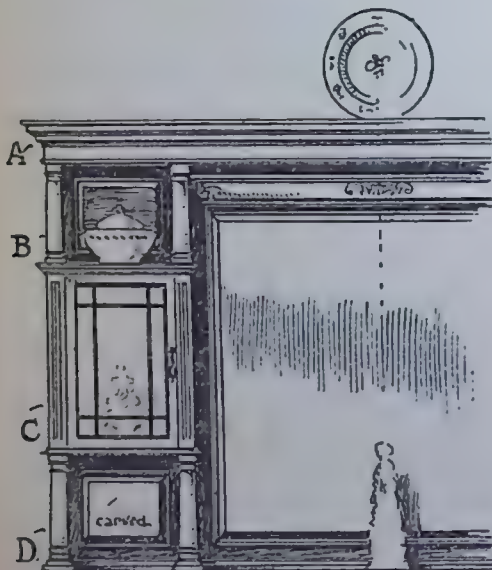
UPPER PART OF SIDEBOARD (No. 328).
